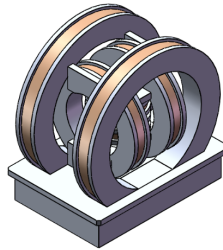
Drawing of the assembled system of 3D Helmholtz coils [23]
